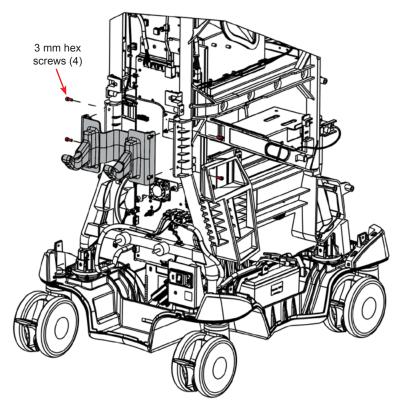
Footswitch Hook Removal (shown with IV Pole removed)
